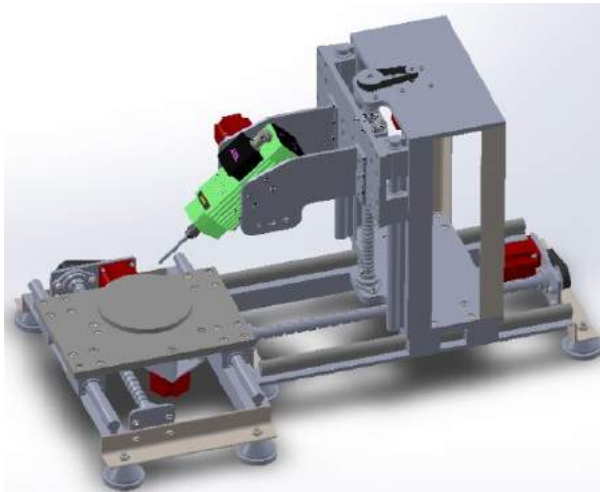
Detailed 3D CAD Model of Micro CNC Milling Machine
